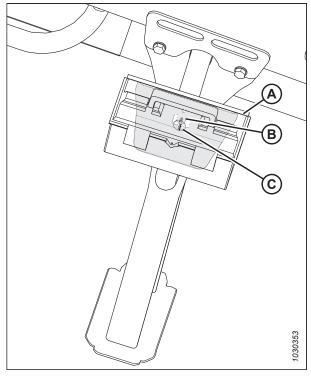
Toolbox Mounted on Jack Stand Bracket
